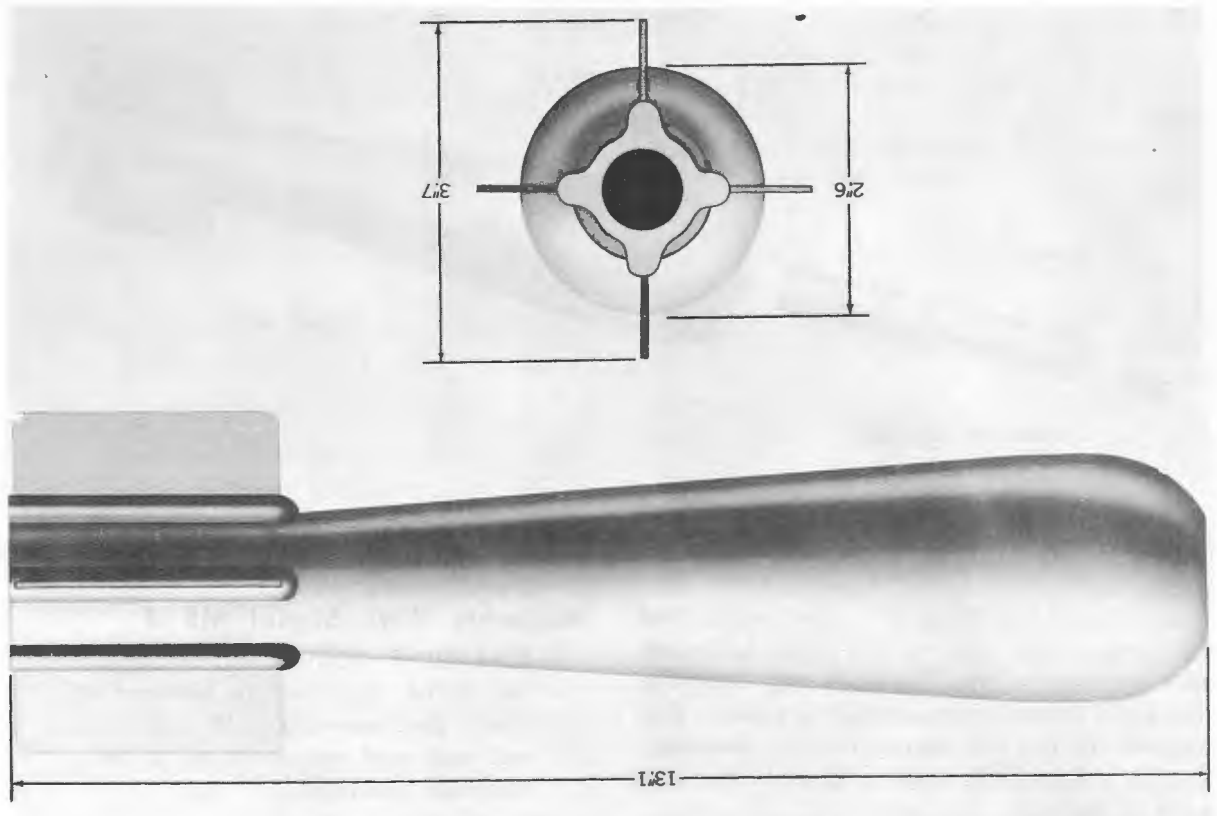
13-lb Miniature Practice Bomb Mk 19 Mod 1, Exterior View.
